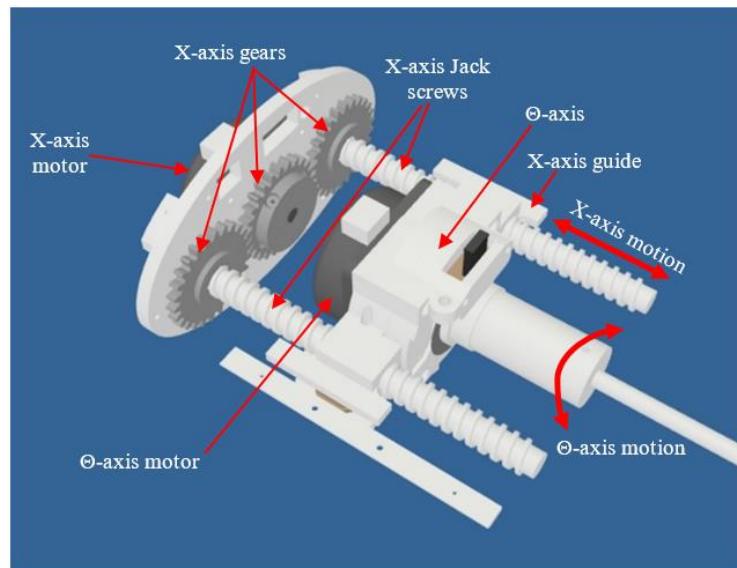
CAD drawing of the linear axis (X-axis).
